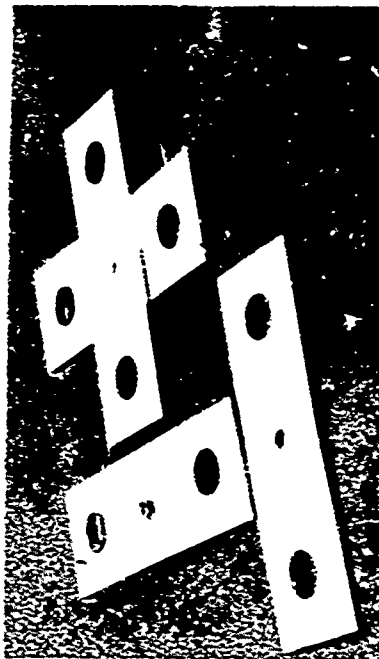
CROSS-TENSION SPOT-WELDED SPECIMEN BEFORE AND AFTER STRENGTH TESTING (REF. 11)
